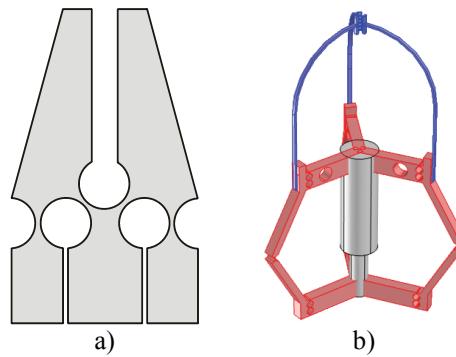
Analysed robotic tools a) planar, b) three-dimensional
